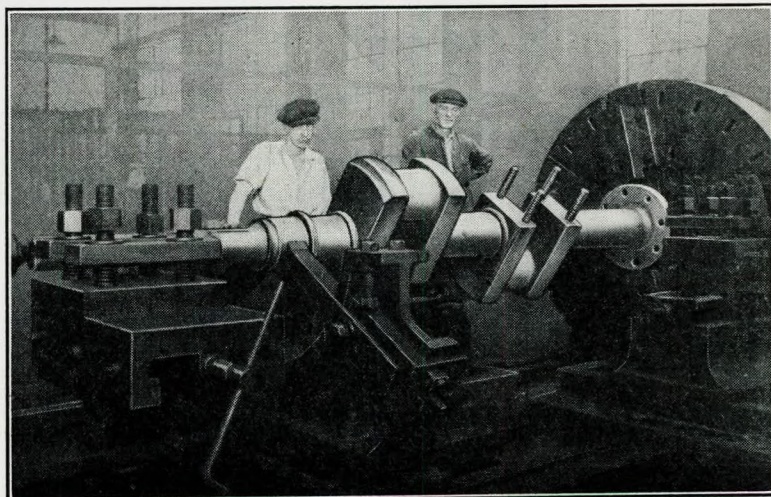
A typical crankshaft repaired after breakage, usually through a web. Pins and journals were built up afresh in addition to re-uniting the damaged parts. The shaft is shown just after machining was completed.
